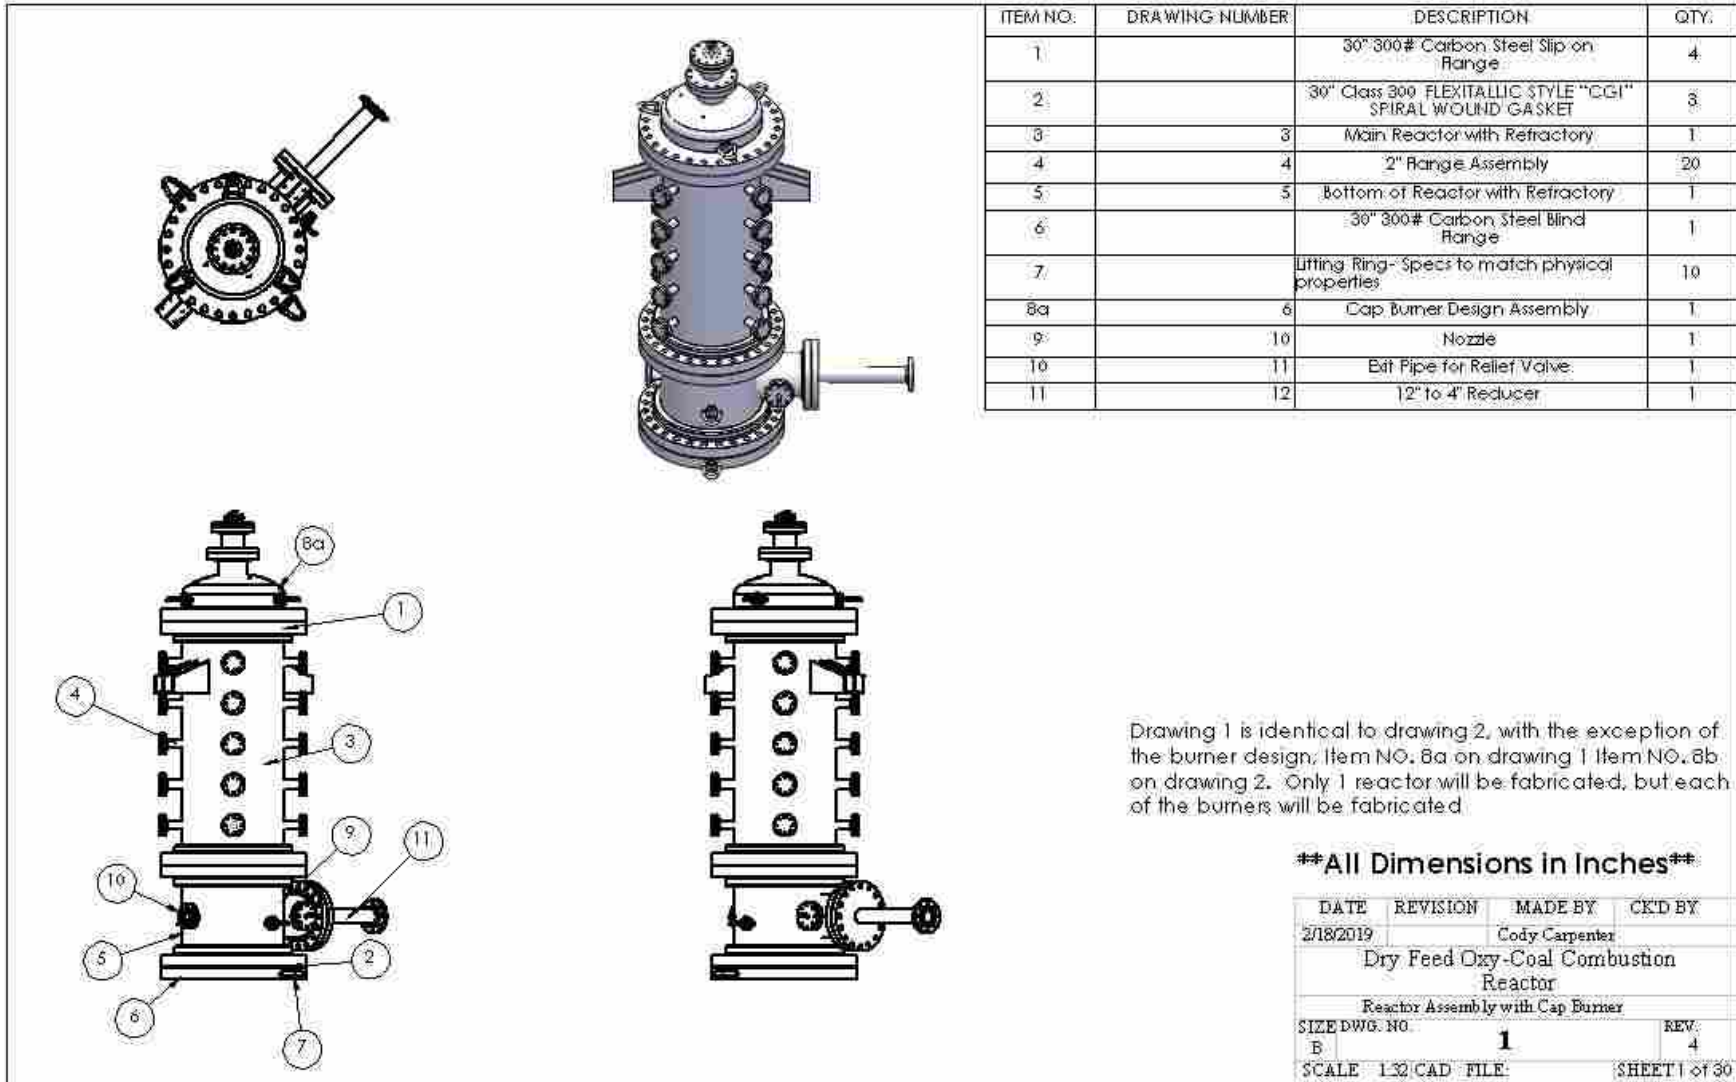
Drawing of POC Reactor Assembly with Cap Burner
